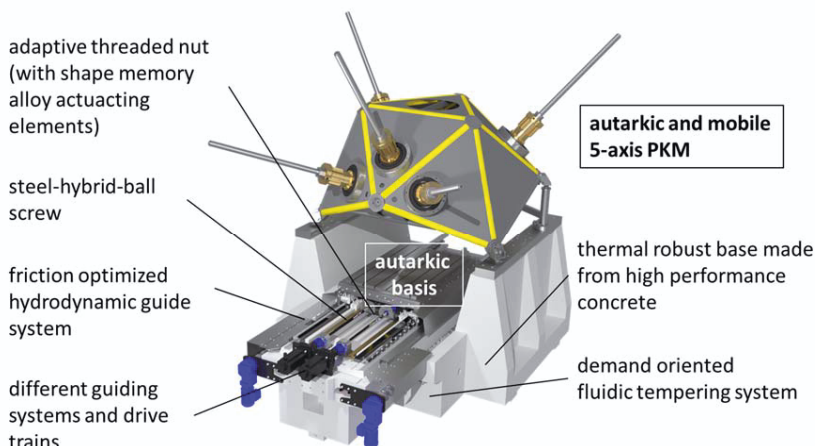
HPC machine frame with a five axis parallel kinematic.
